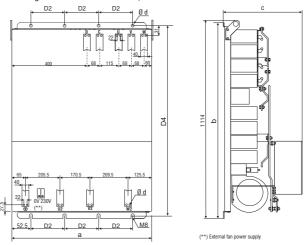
Drive dimensions, C and CP -IP00 sizes
